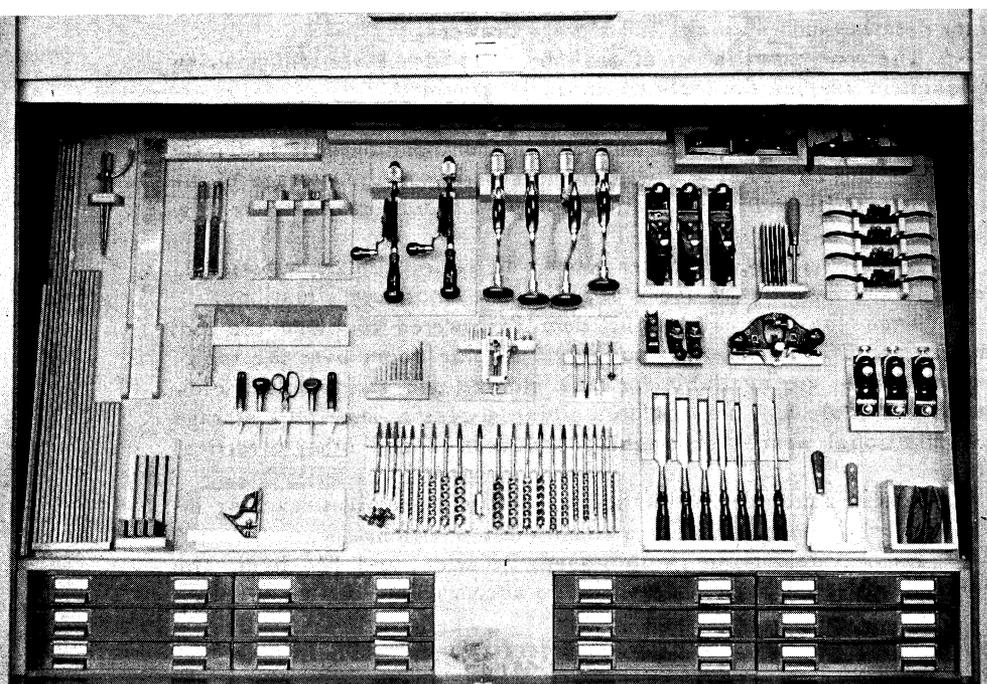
Tool Panels (Courtesy Willis H. Wagner)
